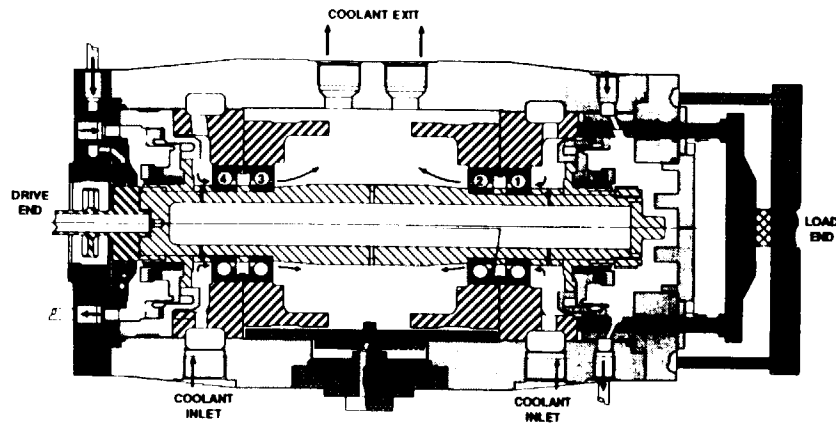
SSME LOX TUBOPUMP BEARING/SHAFT CONFIGURATION
